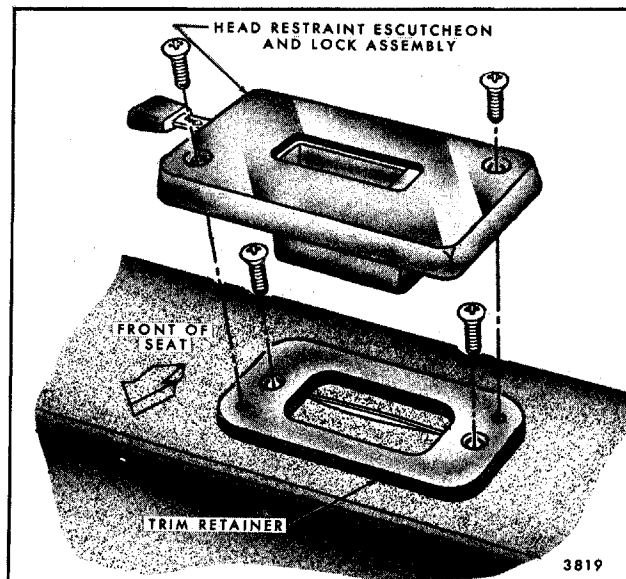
Front Seat Back Head Restraint Retainer, Lock and Escutcheon - "A, E and X" Styles
